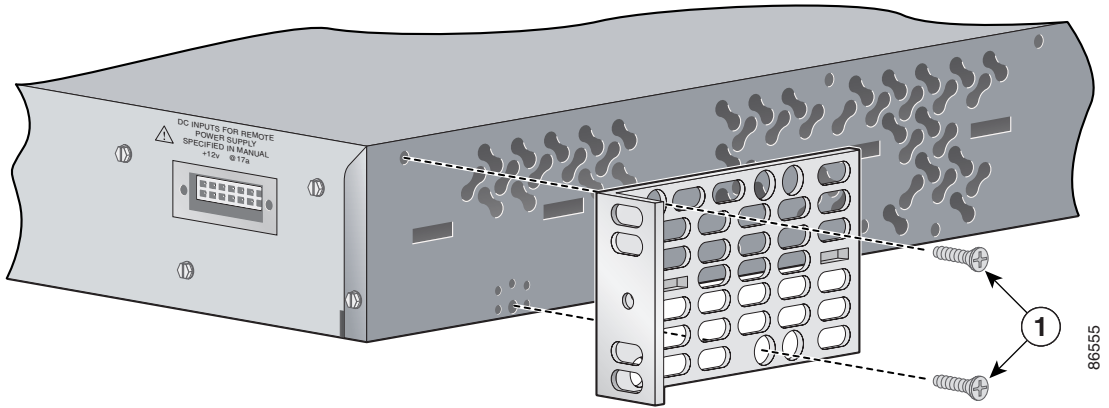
Attaching Brackets for 19-inch Racks, Front Panel Forward
